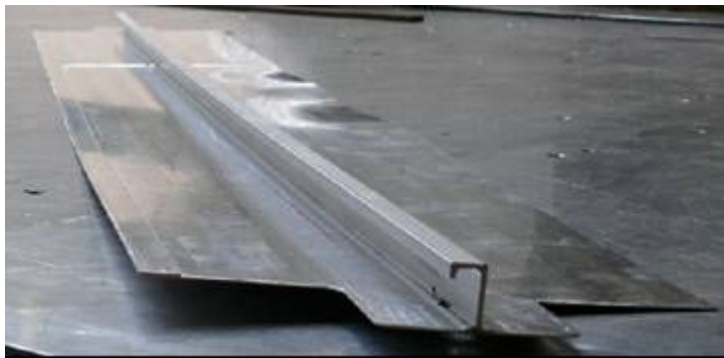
Example of large deformation caused from Laser welding of a stringer. In addition, in this particular case, the presence of gap between stringer and panel has led to a bad quality of LBW
